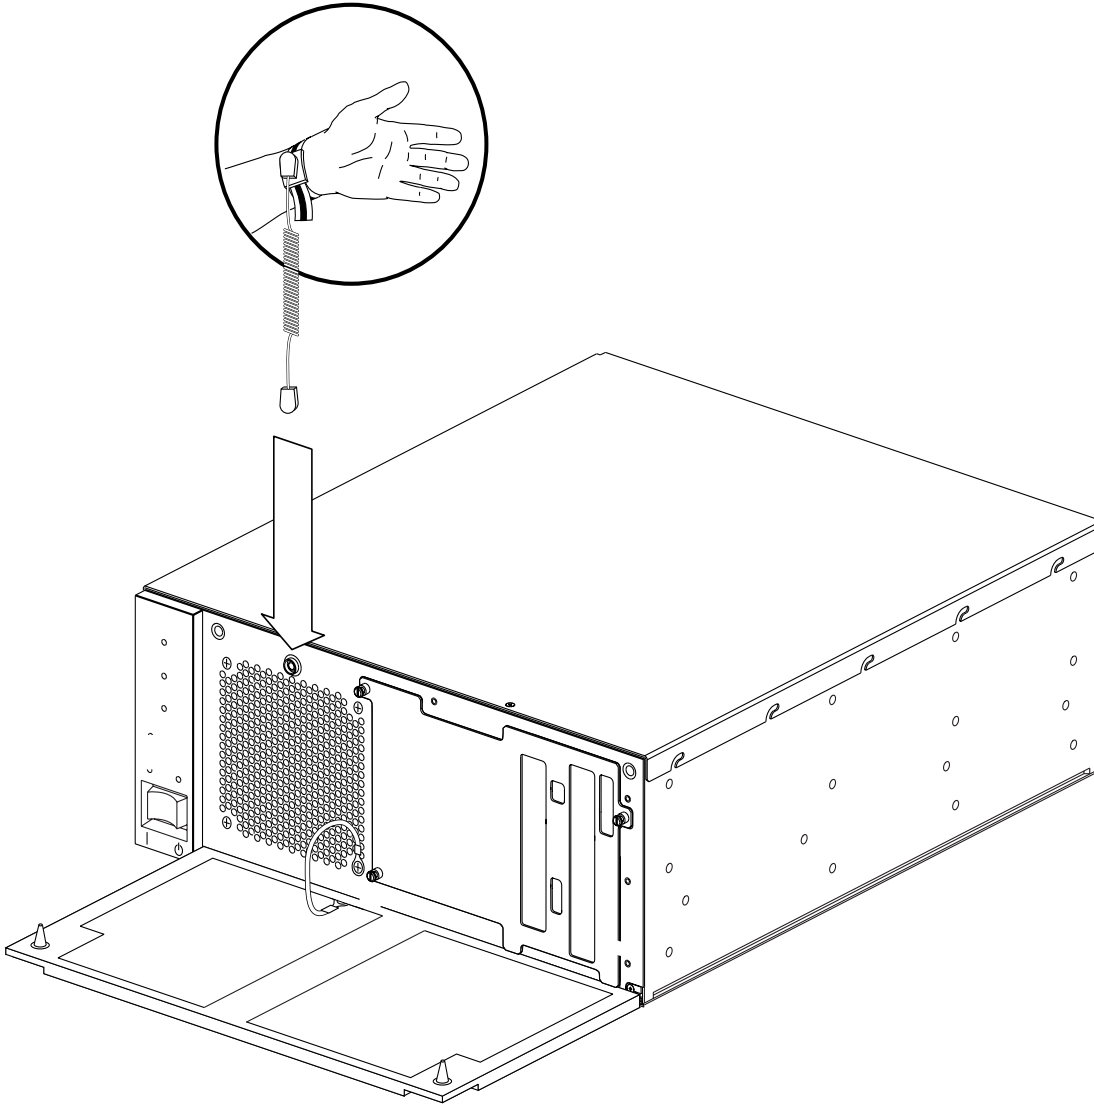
Attaching the Wrist Strap to the Front of the Chassis
